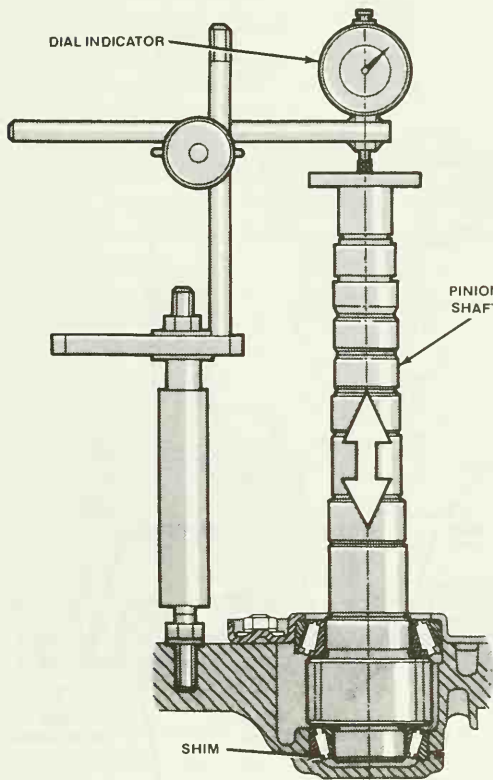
Pinion bearing preload is measured with a dial indicator and corrected with shims under the pinion shaft. (Chrysler Corporation)
